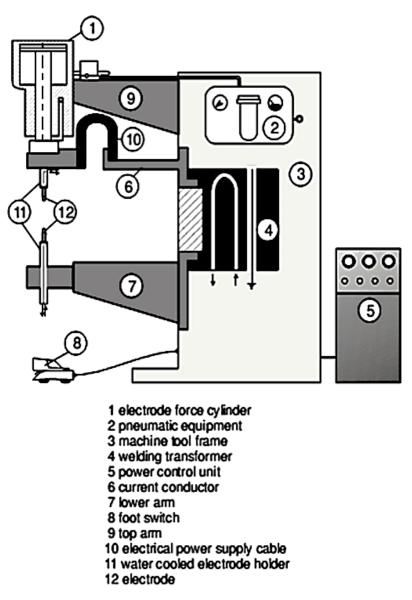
Schematic assembly of spot-welding machine.
